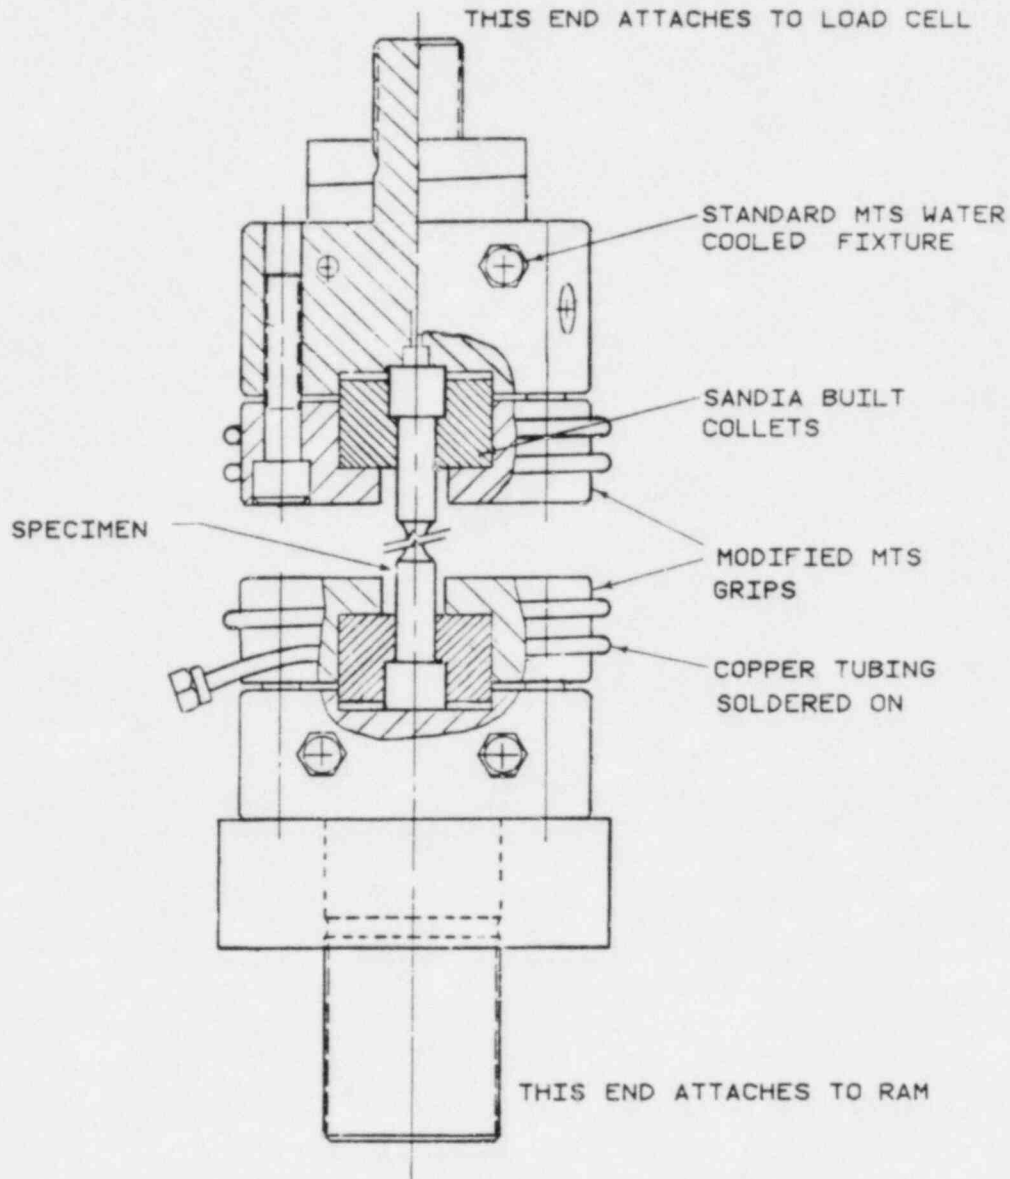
Cutaway assembly drawing of fixtures and grips shown in Fig. 1.
